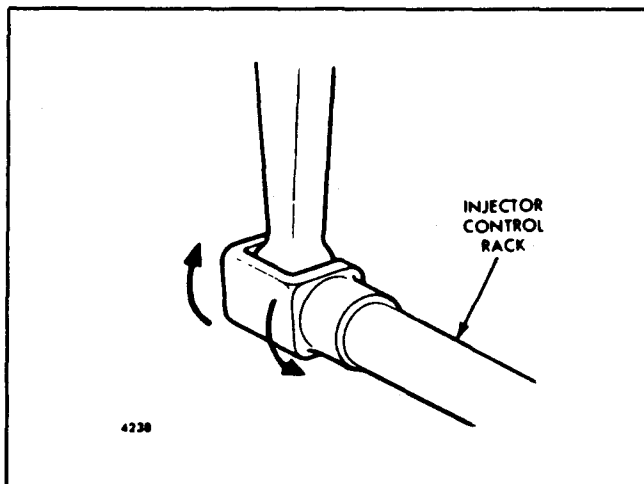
Checking Rotating Movement of Injector Control Rack
